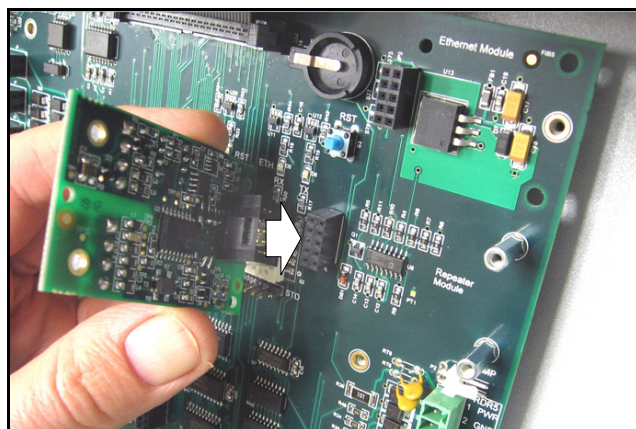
Align the Repeater board plug with Interface board receptacle "JP1".
